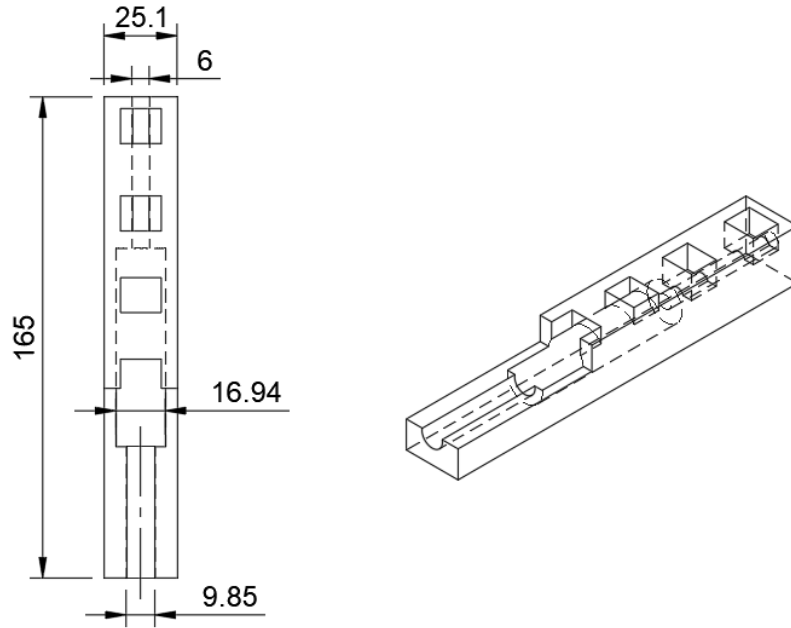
Technical drawing of suction gripper mount. All dimensions given in millimeters.
